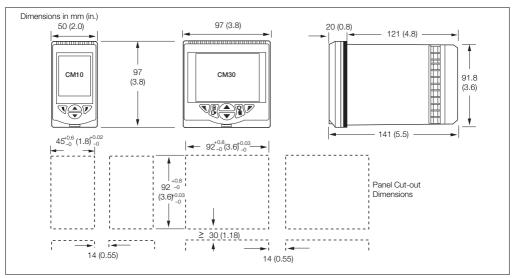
ControlMaster CM10 and CM30 Dimensions
